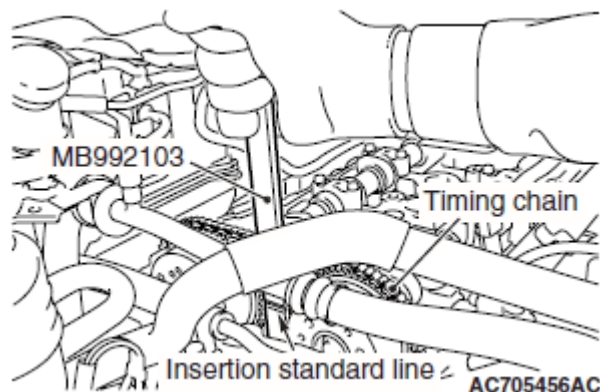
Inserting Timing Chain Case Assembly Using Special Tool MB992103
